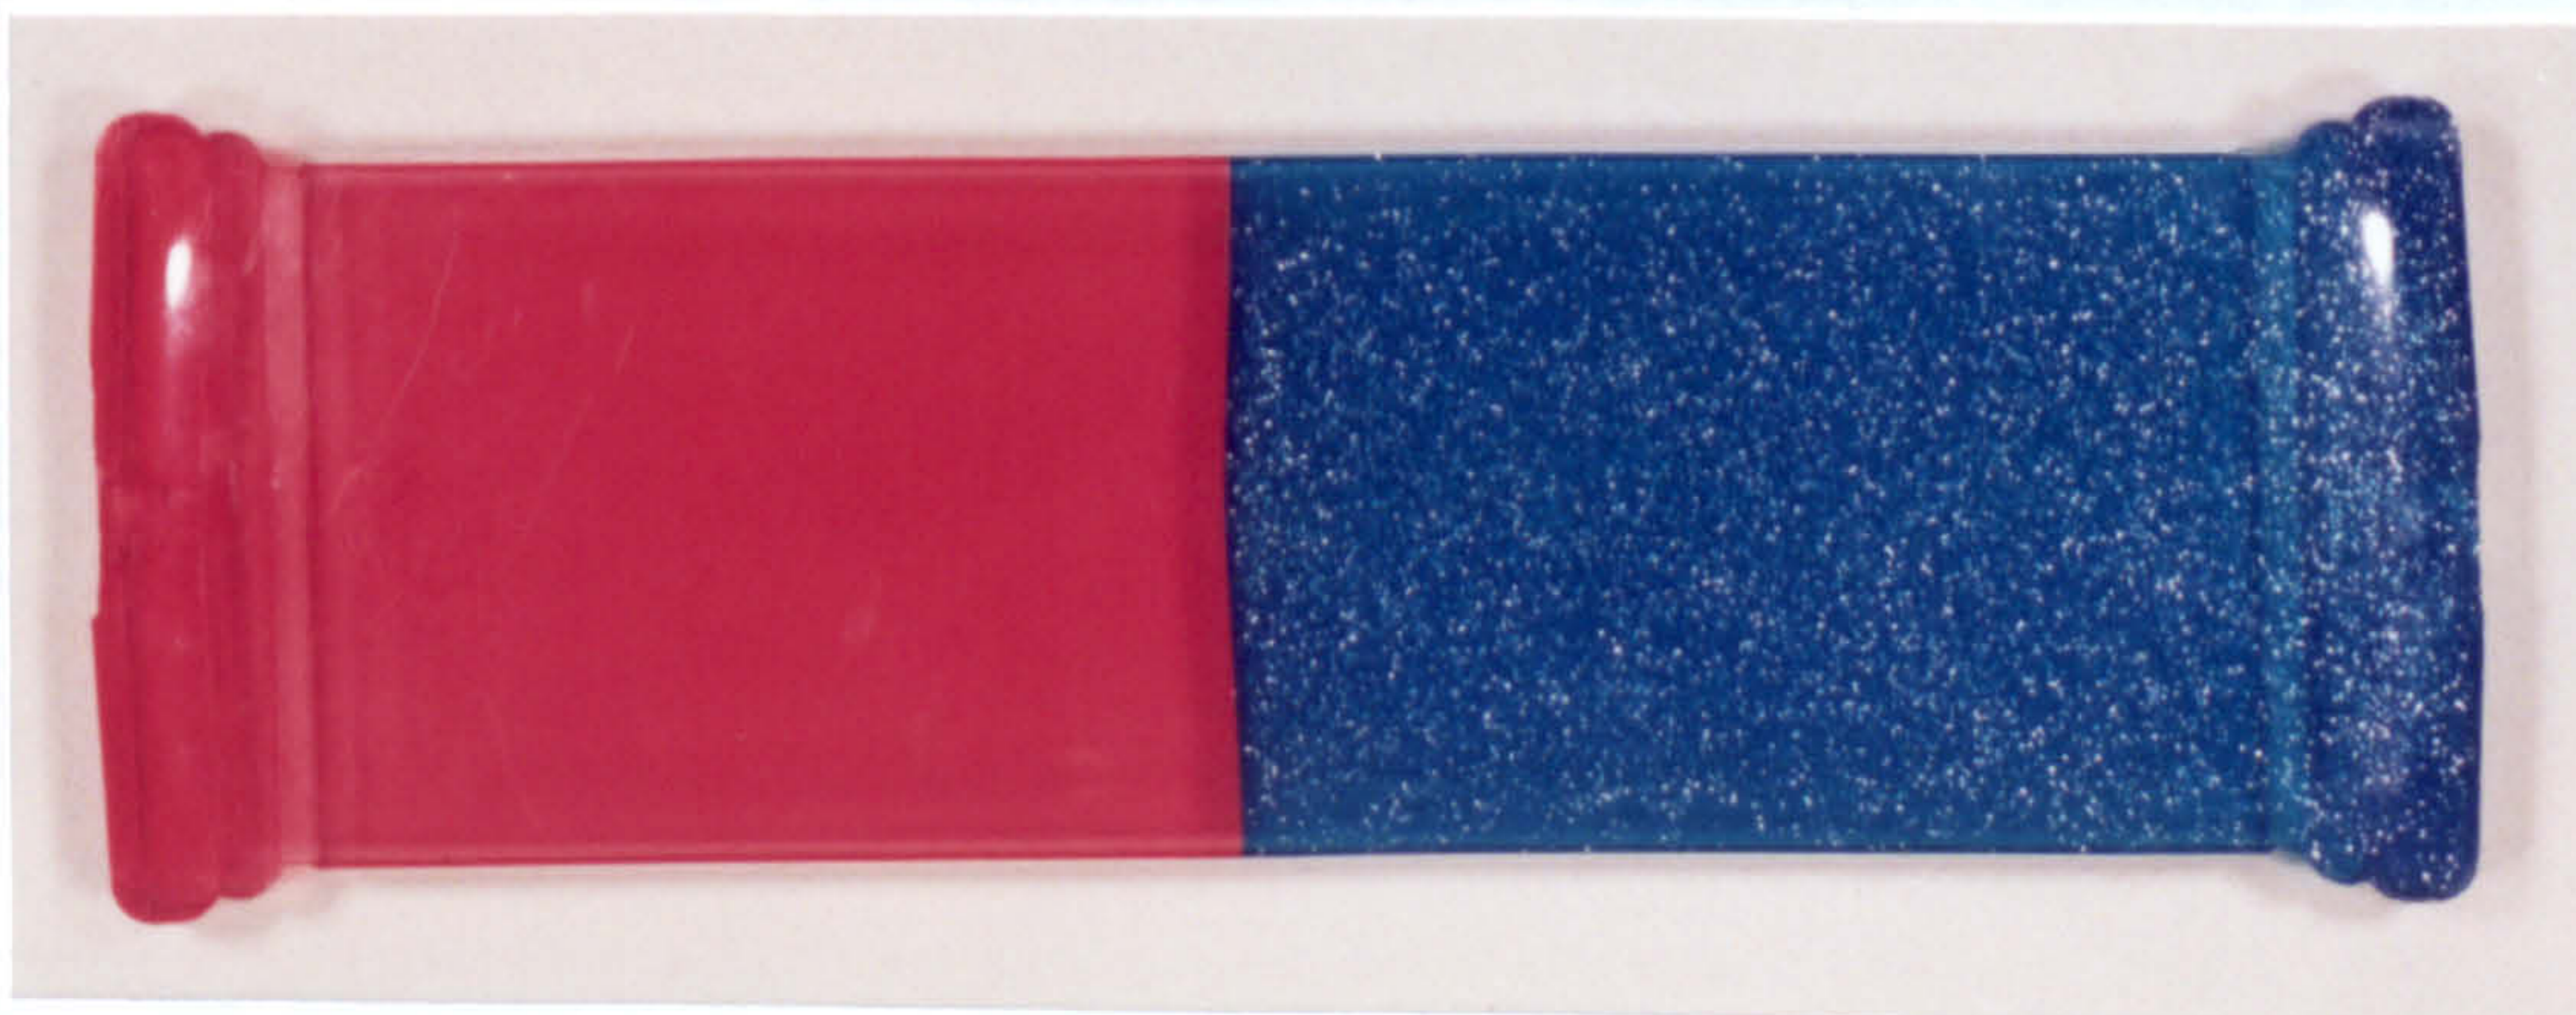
A conventional weld line produced with a two-colour moulding showing the flat interface with minimal surface area for adhesive contact and molecular entanglements to occur.
